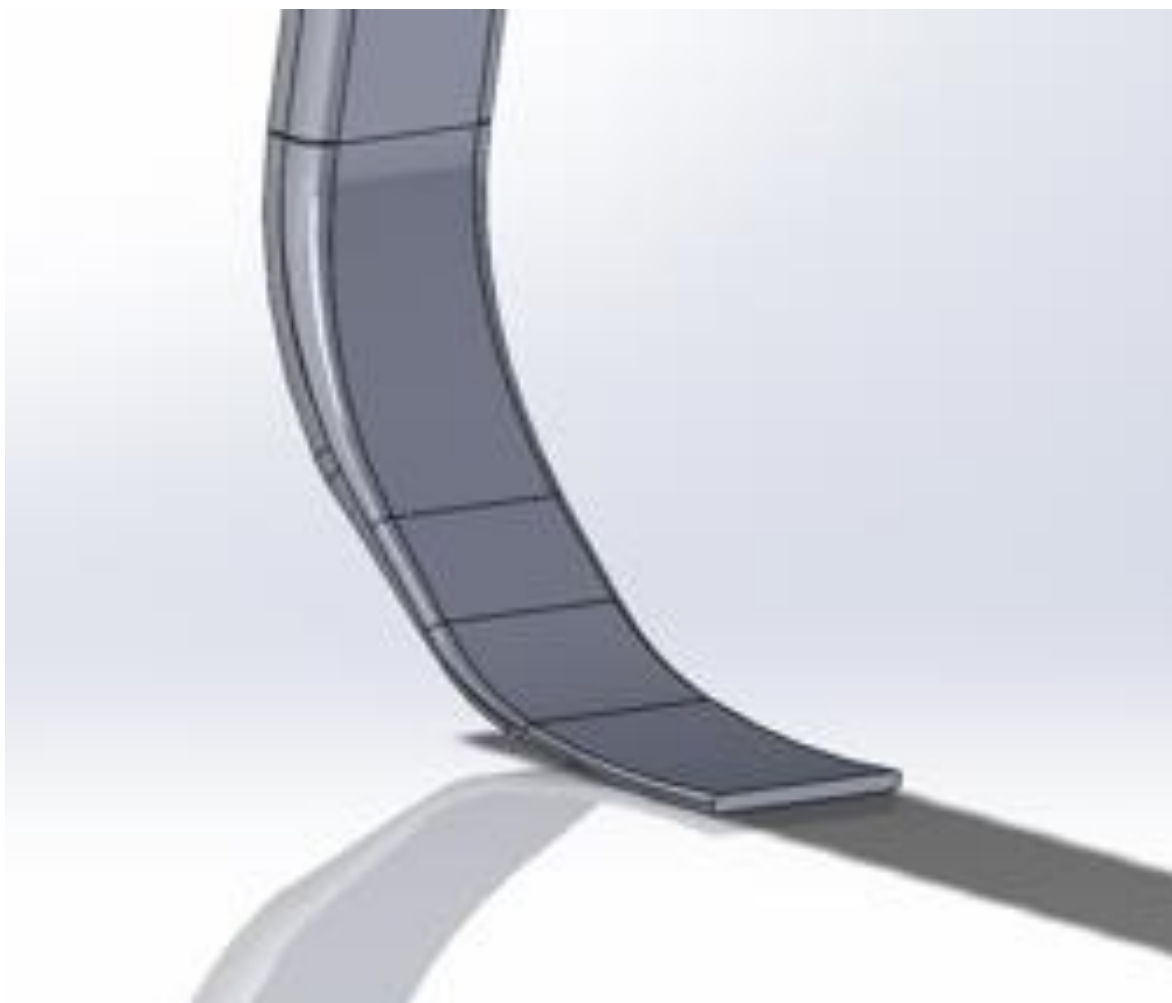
Showing the change in design to allow the crutch to be produced for a 2 part mould allowing for an alternative production method like RTM. This process will use the same fibres and resin system in the Solidworks model, with Composites Integration also comfortable in achieving the strength characteristics of the pre-preg using their process. Feedback from engineers at Composite Integration advised that all holes should be machined after curing to reduce the complexity of the lay-up process.
